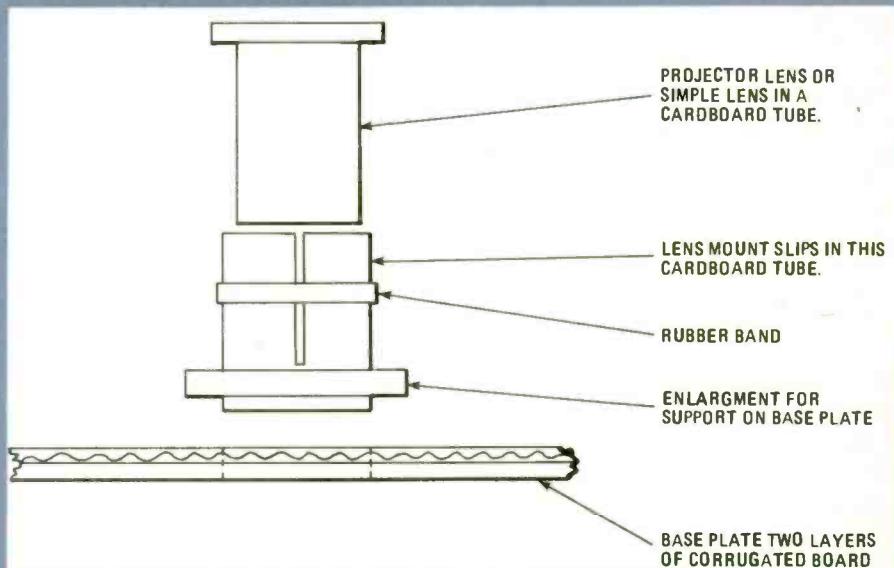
A lens from a slide projector can be held in place by a cardboard tube wound tightly around the lens. That assembly is placed inside another cardboard tube and held in place by friction, supplied by a rubber band.
